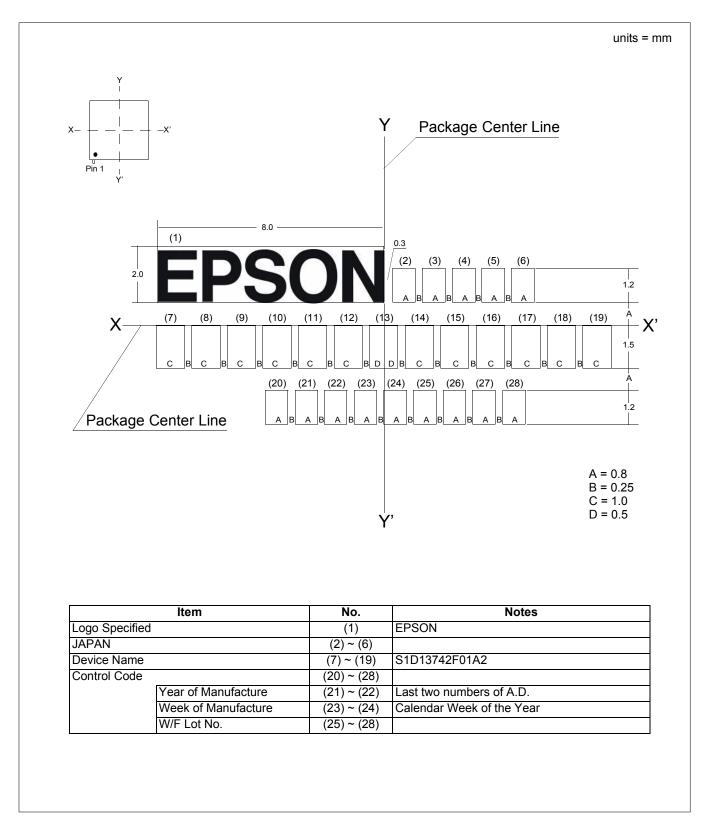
S1D13742 QFP 144-pin Package Marking
